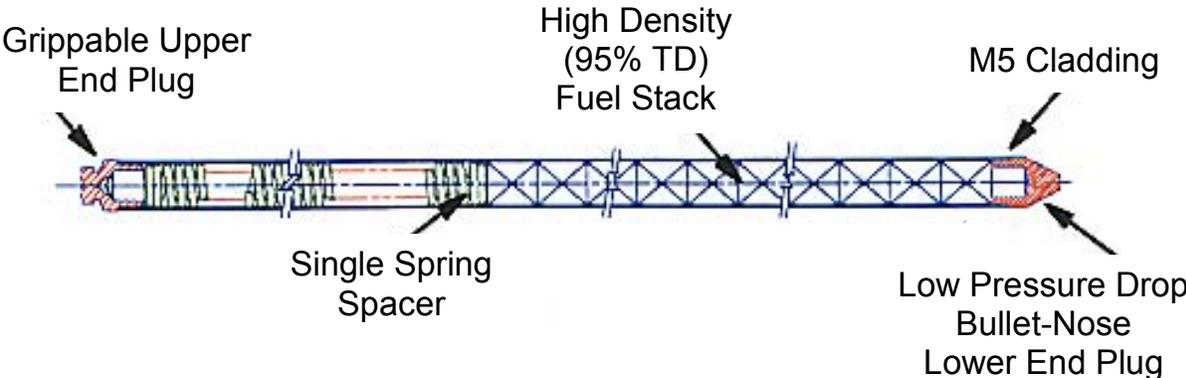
Mark-BW/MOX1 Fuel Rod Design
